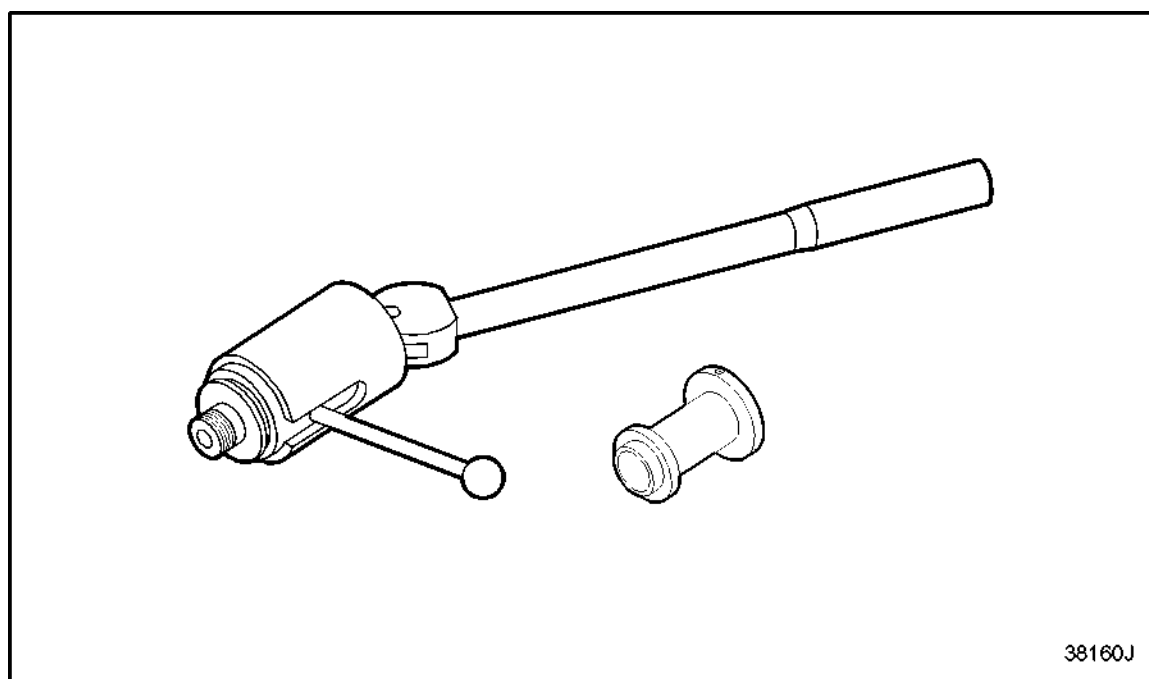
Valve Seat Insert Remover, J 23479-492
